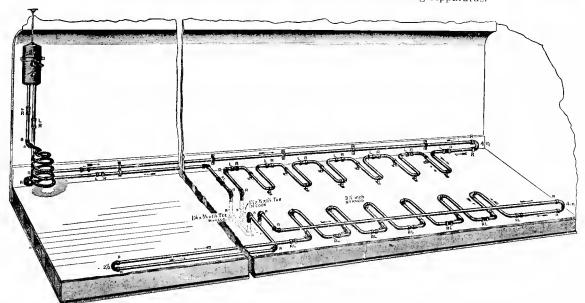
Arrangement of Piping for Passenger Cars Heated with the Baker Heater.
